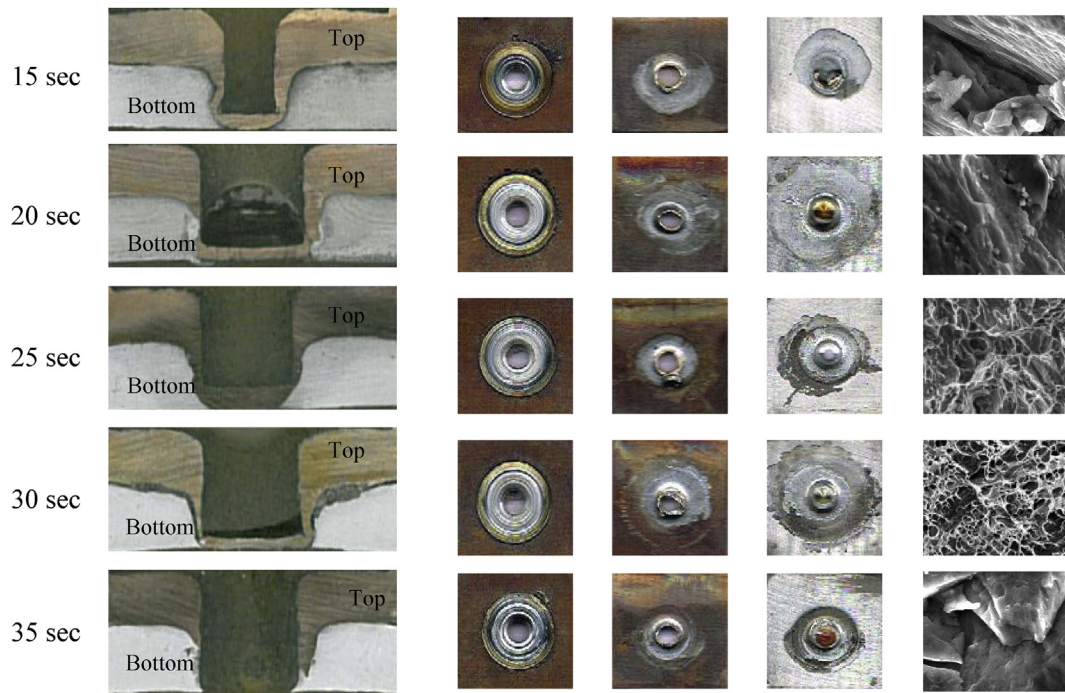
Effect of dwell time on cross-section of weld, top side of top sheet, bottom side of top sheet, top side of bottom sheet and fracture surface.
